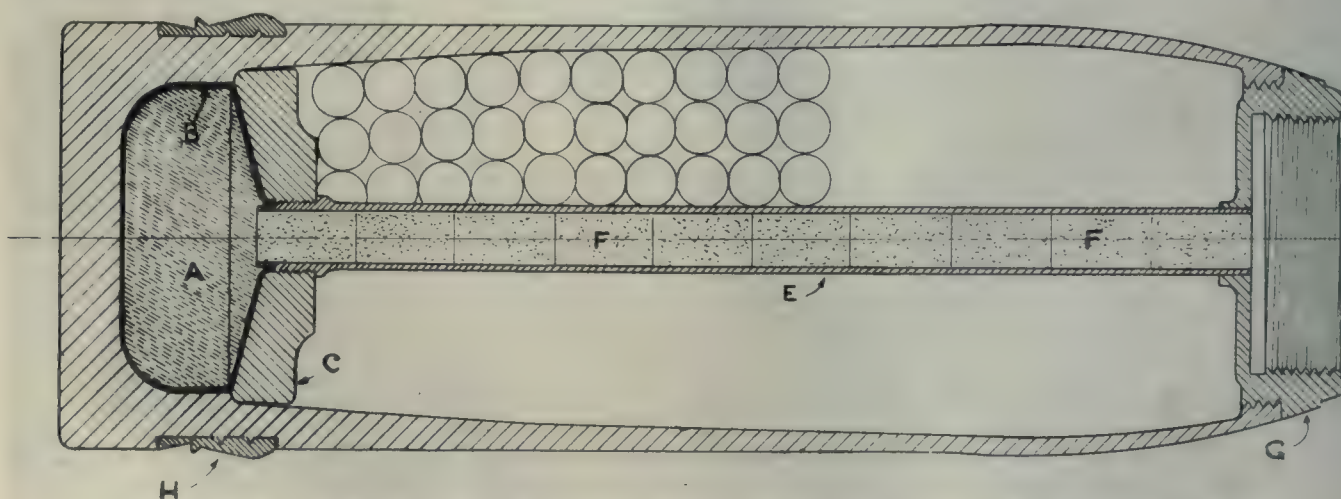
SECTION THROUGH "MADE IN CANADA" 18-POUNDER SHELL ILLUSTRATING MAKE-UP DETAIL.
